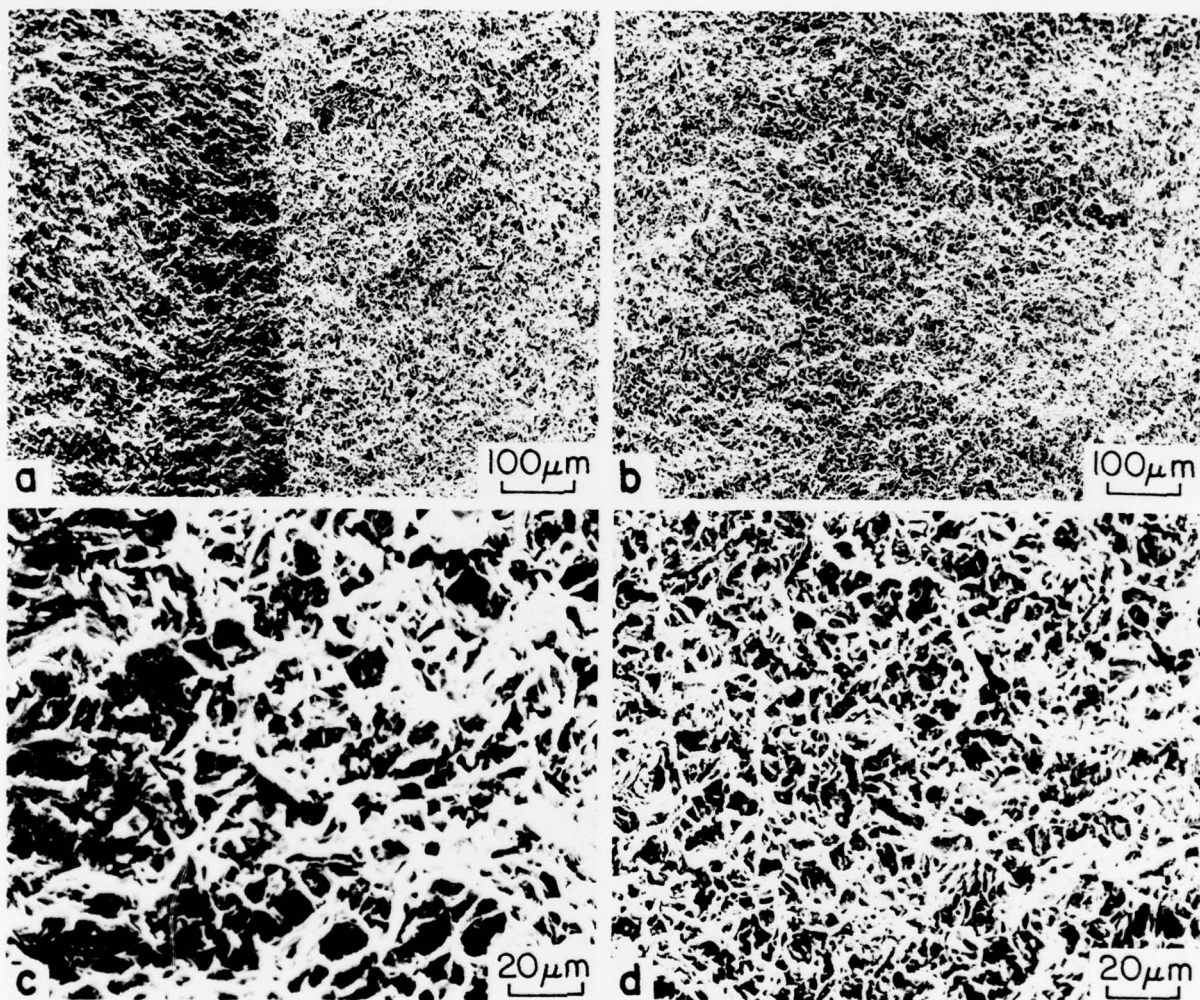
Fracture surface of Condition 8  $K_{IC}$  specimen: (a,c) fatigue precrack to rapid fracture transition; (b,d) rapid fracture.
